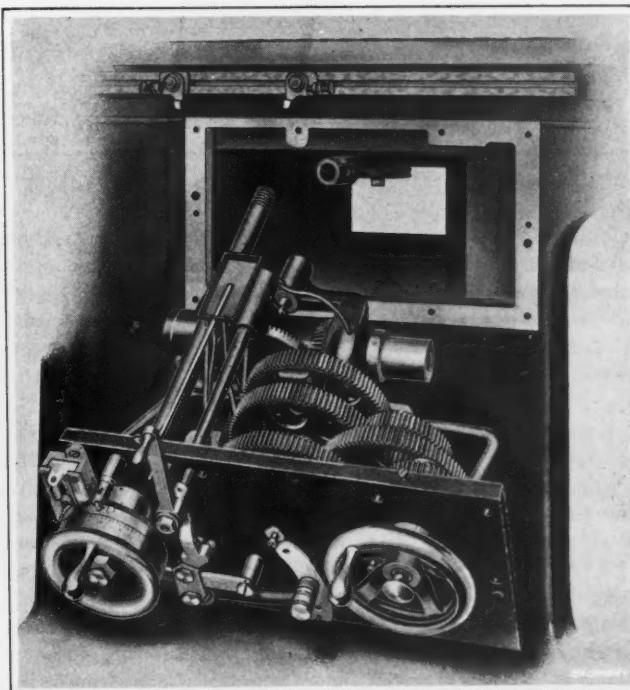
Transmission Gearing of Webster & Perks Grinder
